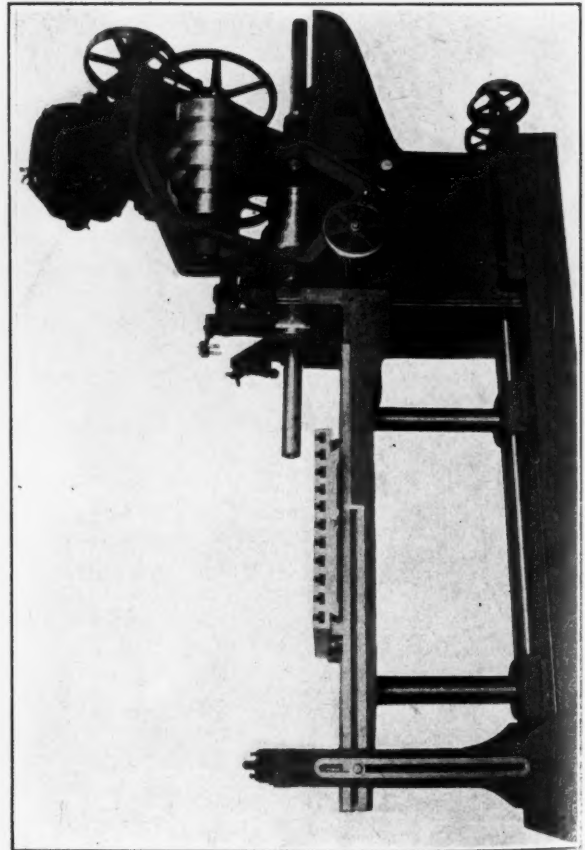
BELTED VARIABLE-SPEED MOTOR DRIVE UPON A HORIZONTAL BORING MACHINE.—BETTS MACHINE COMPANY.
